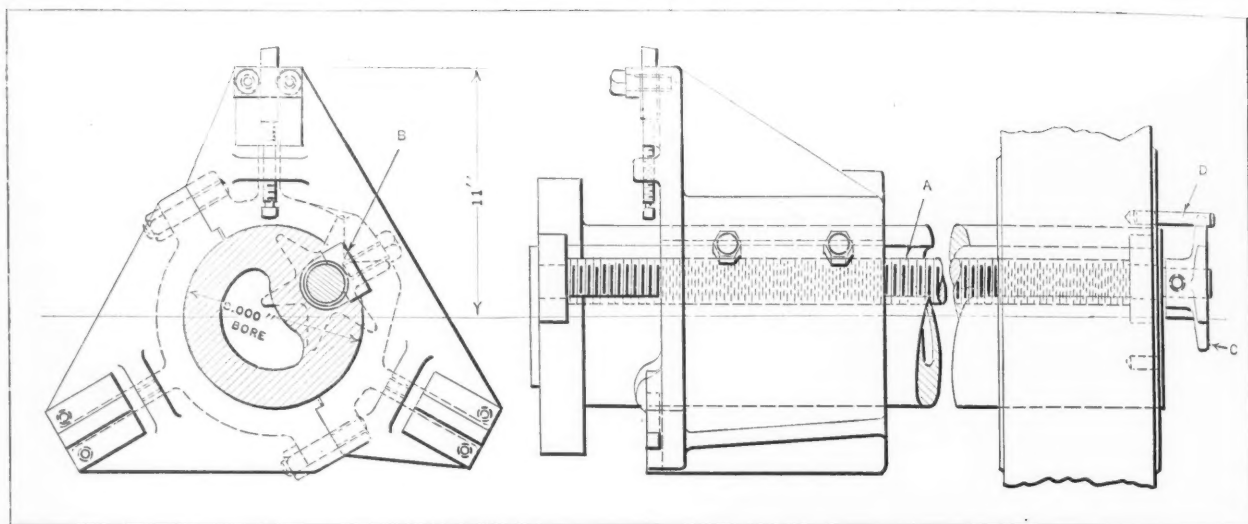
Boring-bar and Head Used in Boring Locomotive Cylinders
